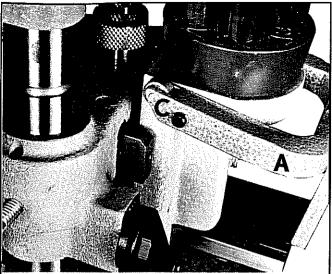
Transfer Clevis (A) with friction reducing roller (C). Whenever machine is cleaned, place a small amount of case lube on the roller. Transfer Cam (B) properly positioned and adjusted.
